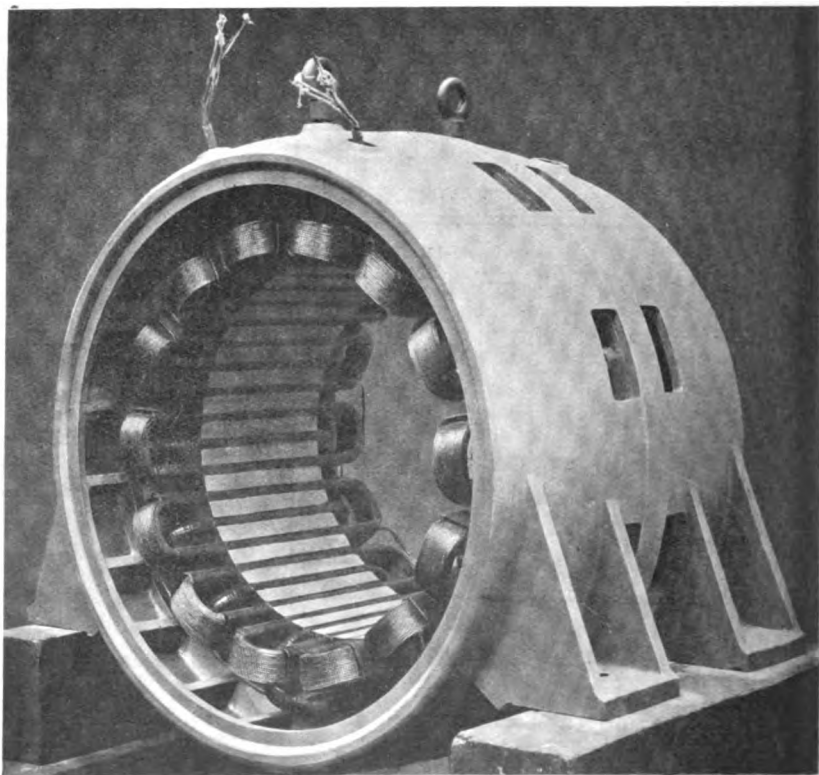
STATOR OF FVNN'S 35 H.P. SINGLE-PHASE INDUCTION MOTOR, showing two sets of coils.
